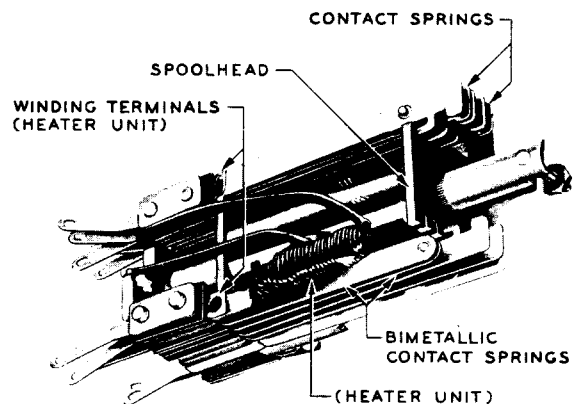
Type Relay — General View Showing Thermal Unit
